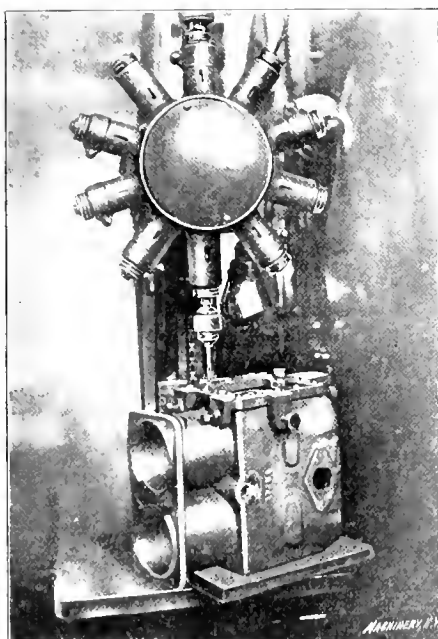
Drilling and Tapping Holes for Water Jacket Cover
